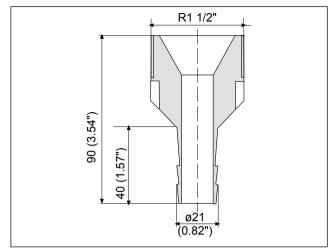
19 mm sample line connector for the sampler (H4500058).
